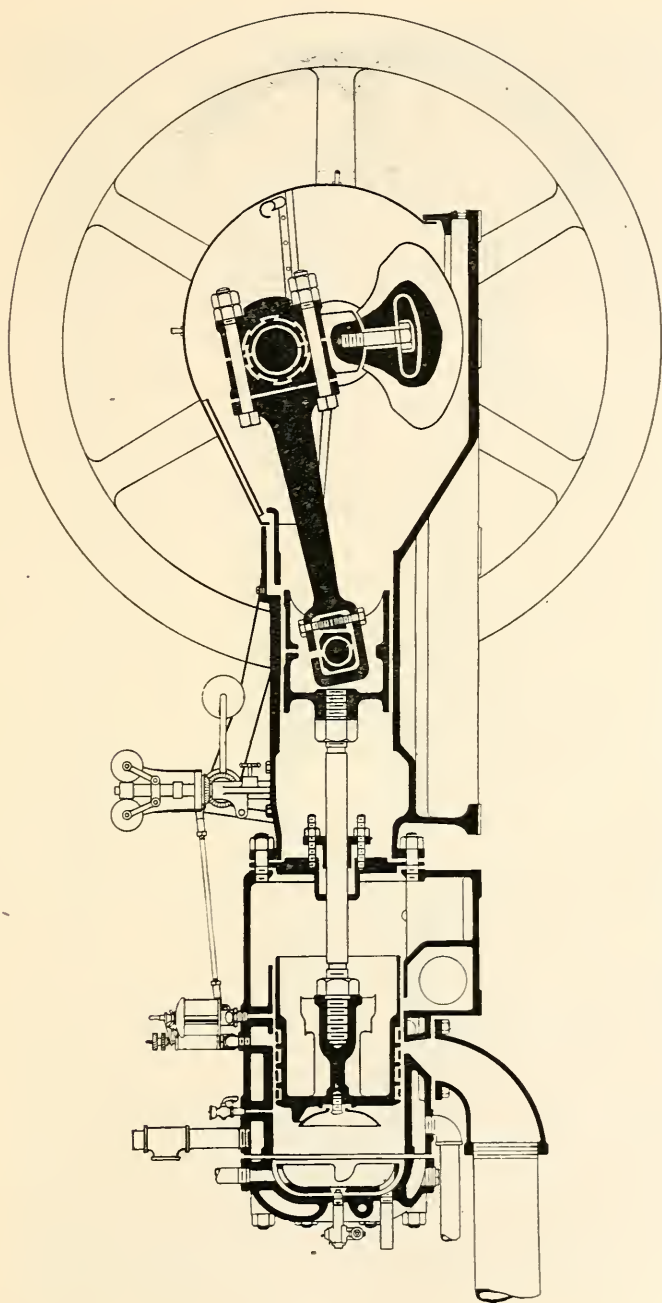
"Giant." Courtesy Chicago Pneumatic Tool Co., Chicago, Ill.
